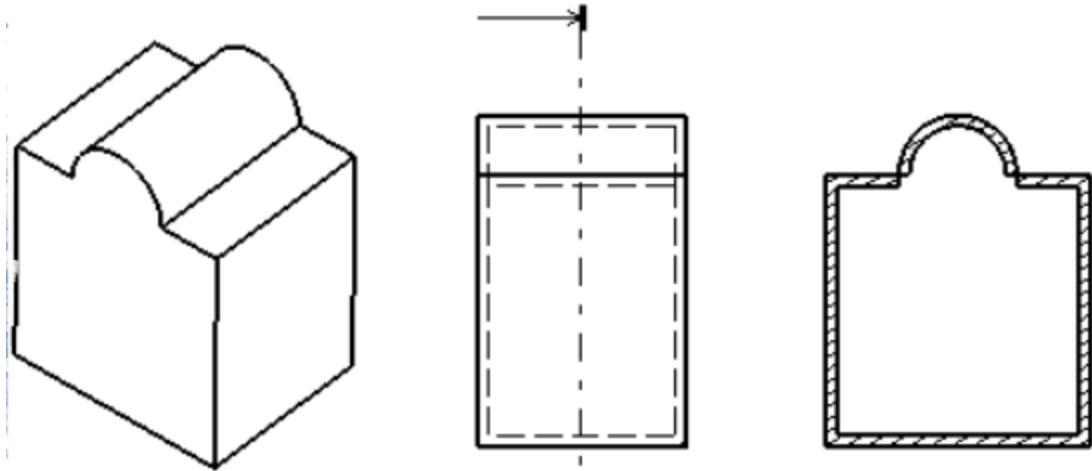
3D hollow solid part views (Isometric view, View from side, Section Cut view)
